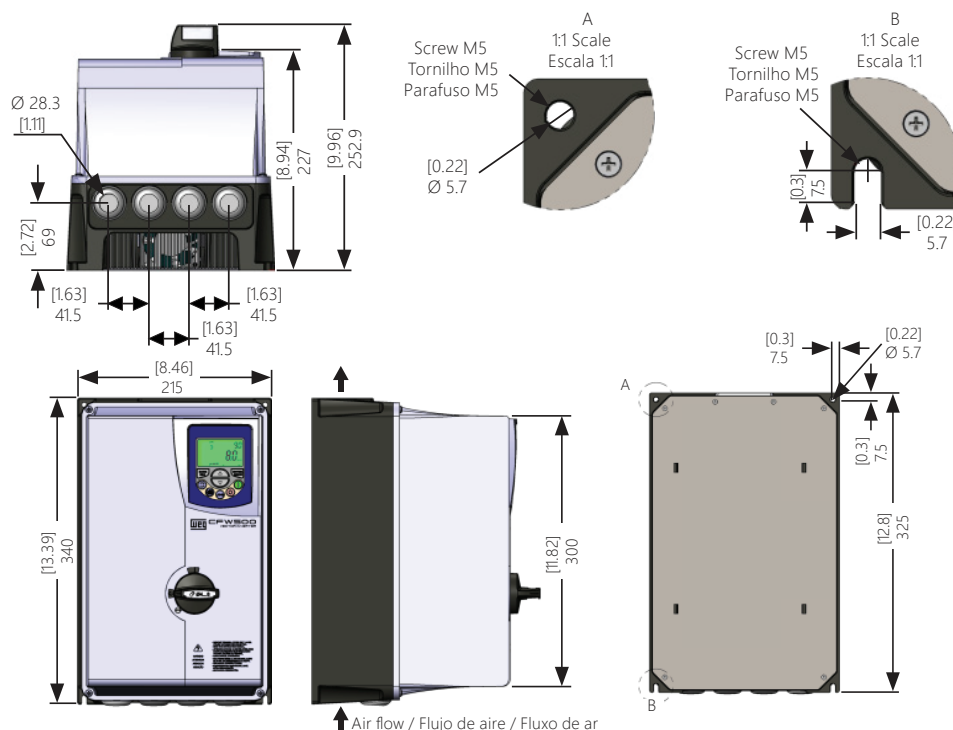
Dimensions of the CFW500 IP66 frame size B
